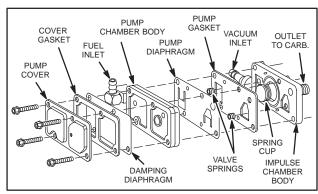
EXPLODED VIEW, TYPICAL FUEL PUMP
